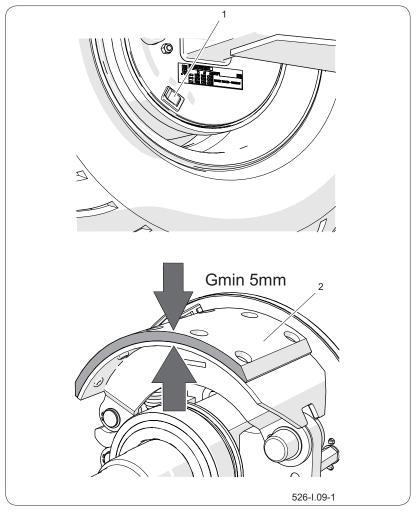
Checking the brake lining thickness (1) blanking plug (2) brake lining
